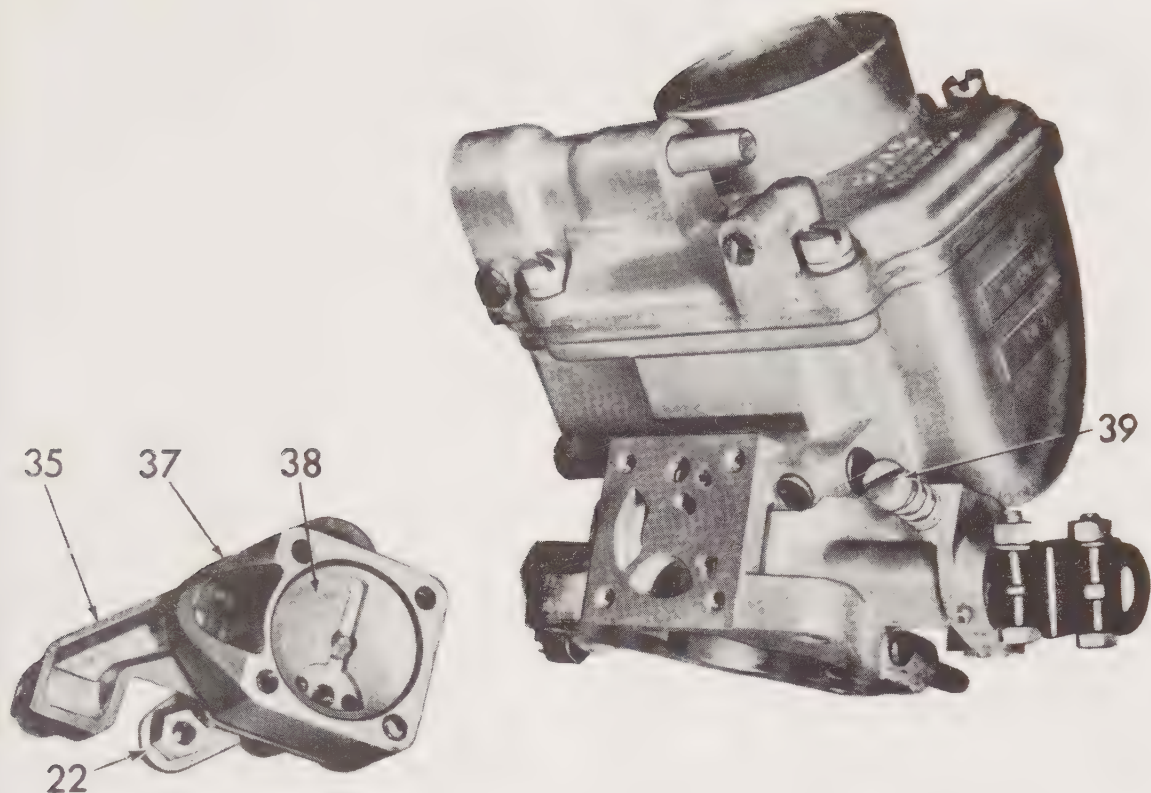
8 Starting device removed from Solex type B32 P1 H carburettor. (For part numbers refer to Fig 2:15.)
